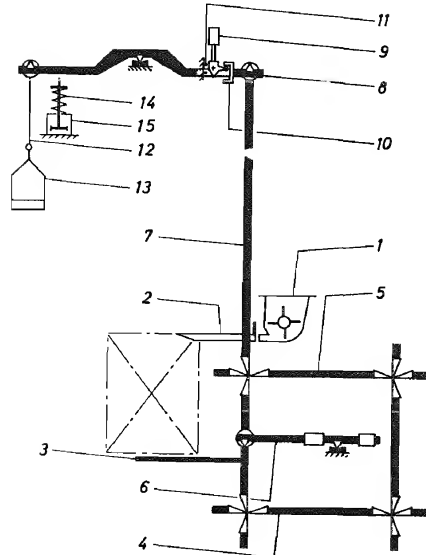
Diagram of a rotary packing machine with equal-arm weigh-beam
